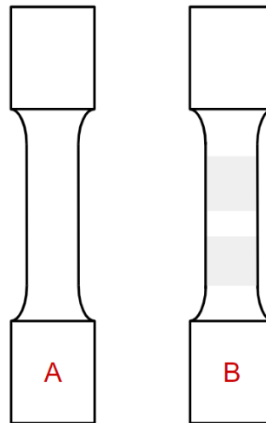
Test specimens used: A - Neat specimen; B - Zebra crossing-like specimen.
